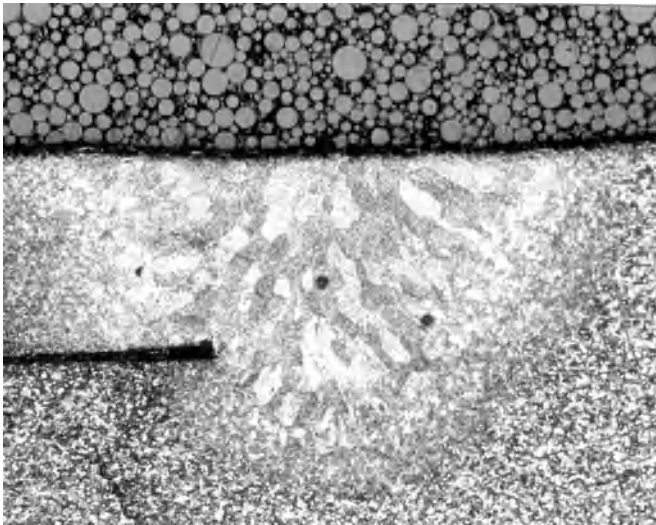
Pulsed YAG laser weld of 1 mm thick zirconium alloy Zy4
